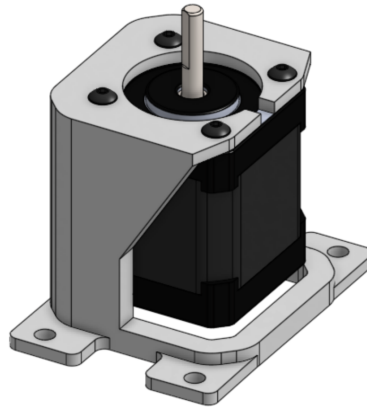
Auger motor mount, alternate angle showing #6-32 $\frac{3}{8}$ " bolt placement.
